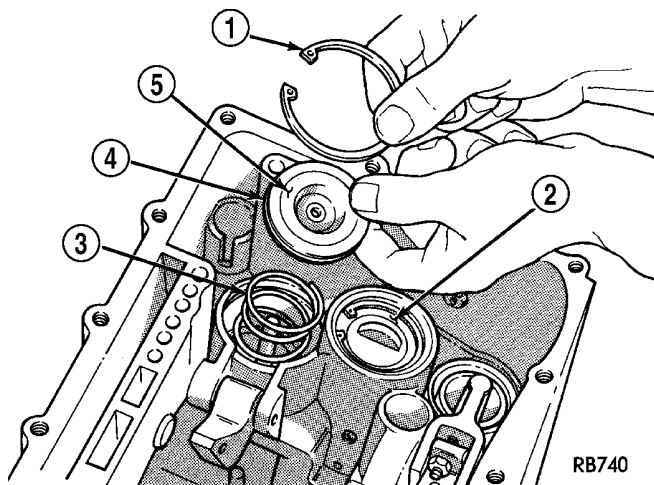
Kickdown Servo Rod Guide and Snap Ring
